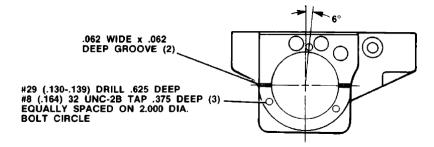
Dimensions for Machining 17 ft-lb Servo Cylinder for Weatherproof Boot
